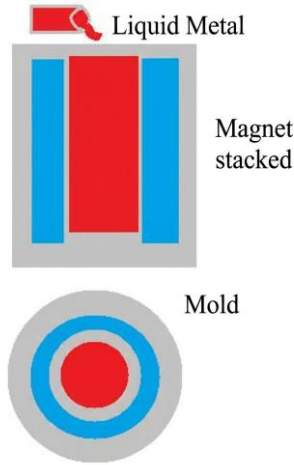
Schematic view showing molten metal flow into a mould in the presence of a permanent magnet
